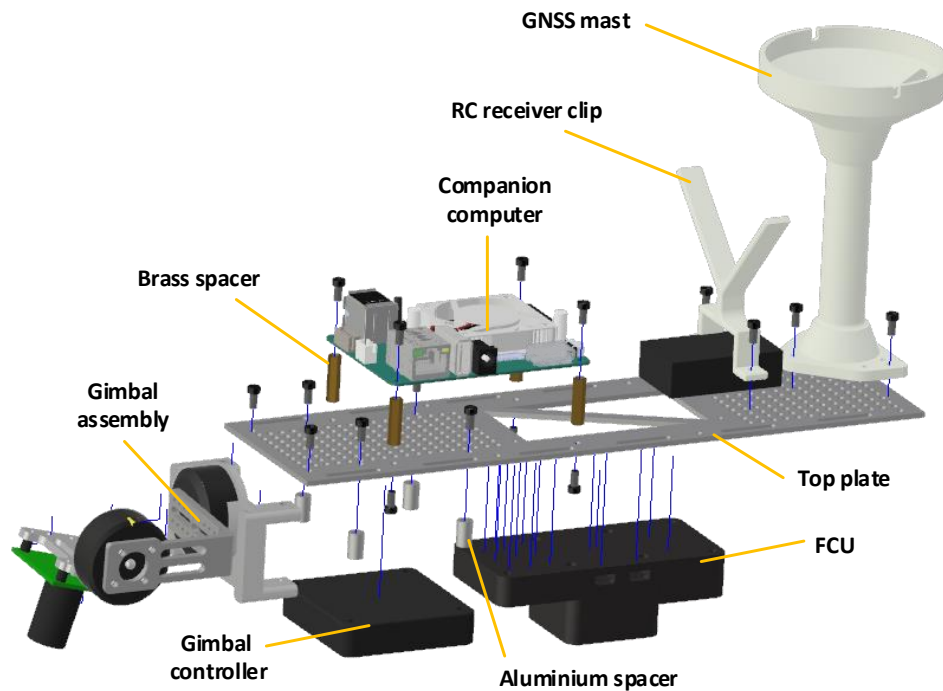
Exploded CAD diagram showing the custom top plate and associated custom hardware parts and key electronic control modules. Holes and cutouts were included to reduce weight and provide fastening points for electrical harnesses and to enable future hardware alterations to the avionics system.
